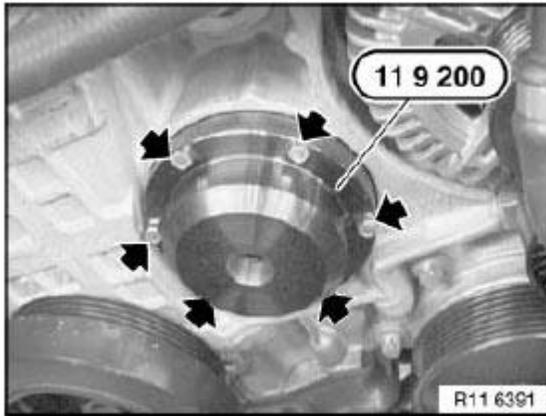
Inserting Screws Until Flush Only Using Special Tool 11 9 200
